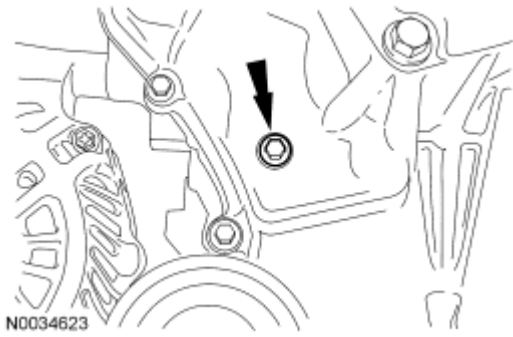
Locating Upper Front Cover Timing Hole Plug
